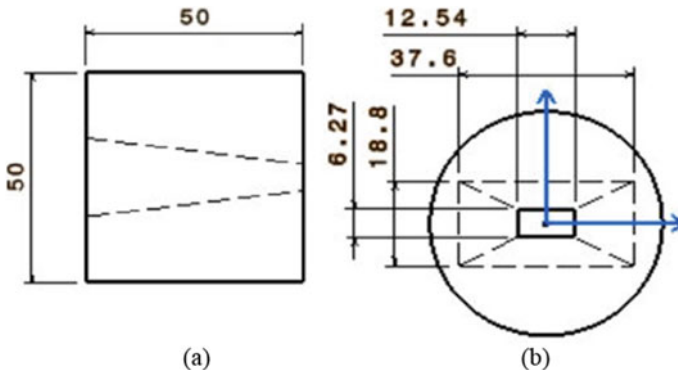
Side view (a) and front view (b) of rectangular nozzle, (All dimensions are in mm)
